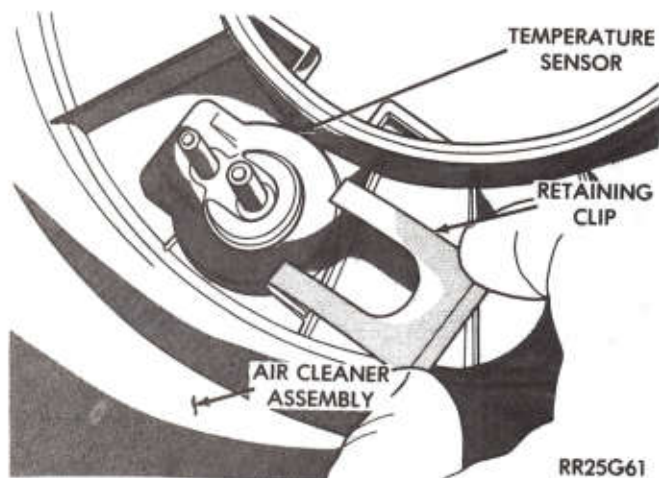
Removing Sensor Clip (Fuel Injected Engines)
